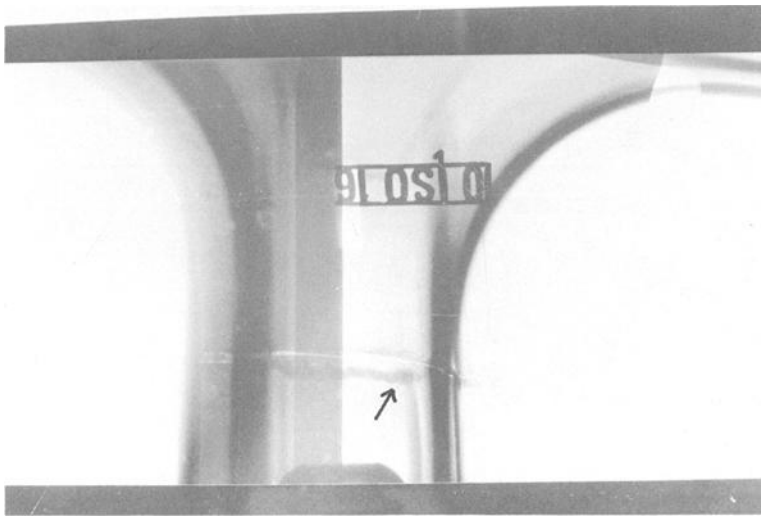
Positive of radiograph of front-right doorpost; arrow points to dark line, which is a non-original welding seam.
